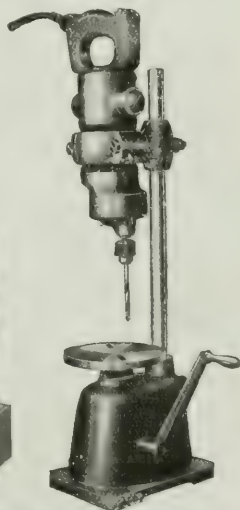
A WITTON-KRAMER BENCH DRILL.
